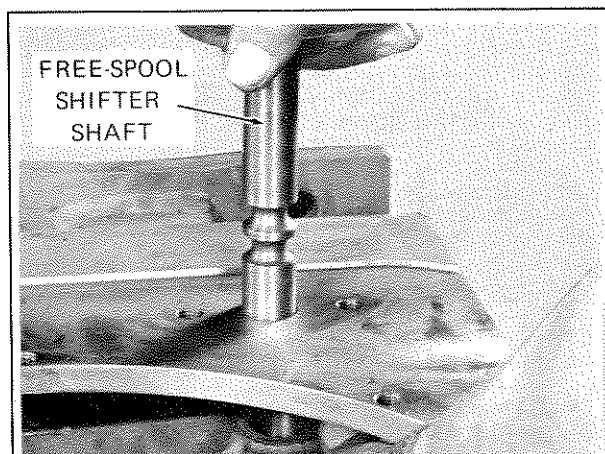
Removal of Intermediate Gear Shaft Assembly (Sheet 1 of 3)
